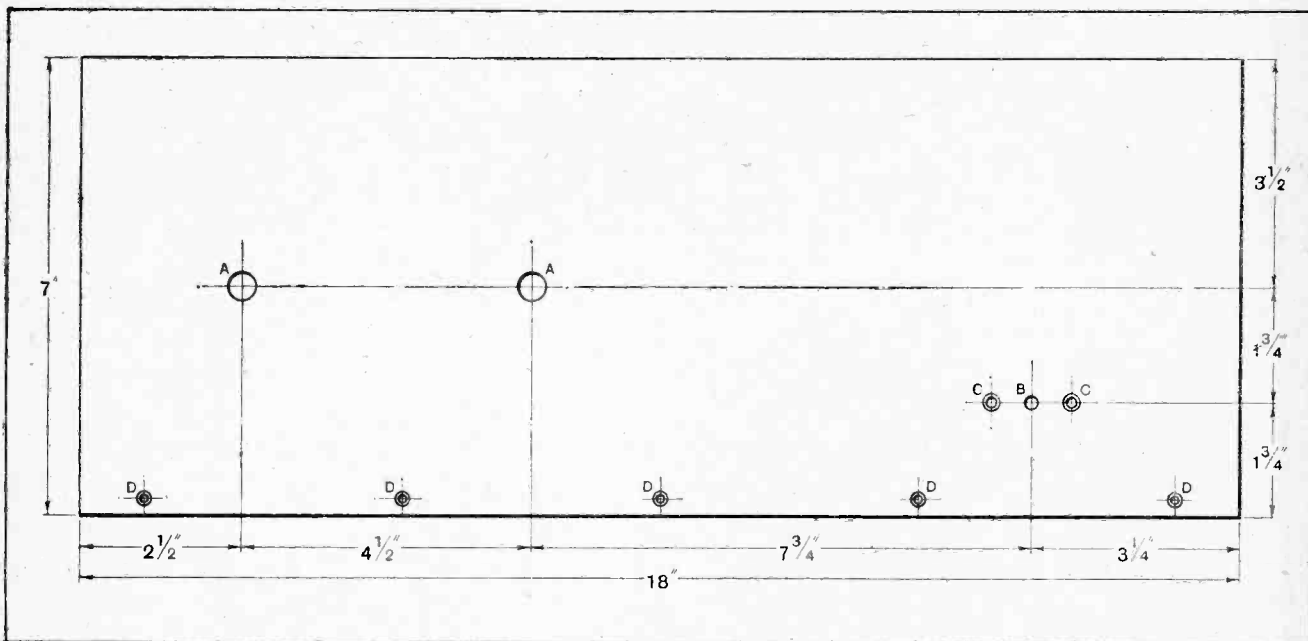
Details for drilling the front panel. Sizes of holes: A, 7/16in.; B, 3/16in.; C, 5/32in. and countersunk for 4 B.A. screws; D, 1/8in. and countersunk for No. 4 nut screws.
